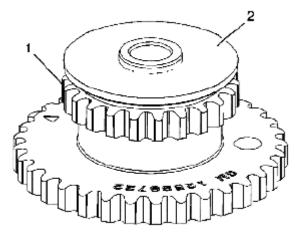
Inspecting Front Of Left Intermediate Sprocket Courtesy of SUZUKI OF AMERICA CORP.
